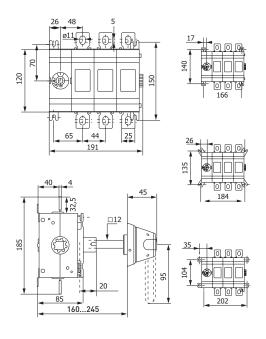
Overall and installation dimensions of 315-400 A 3P switch disconnectors
